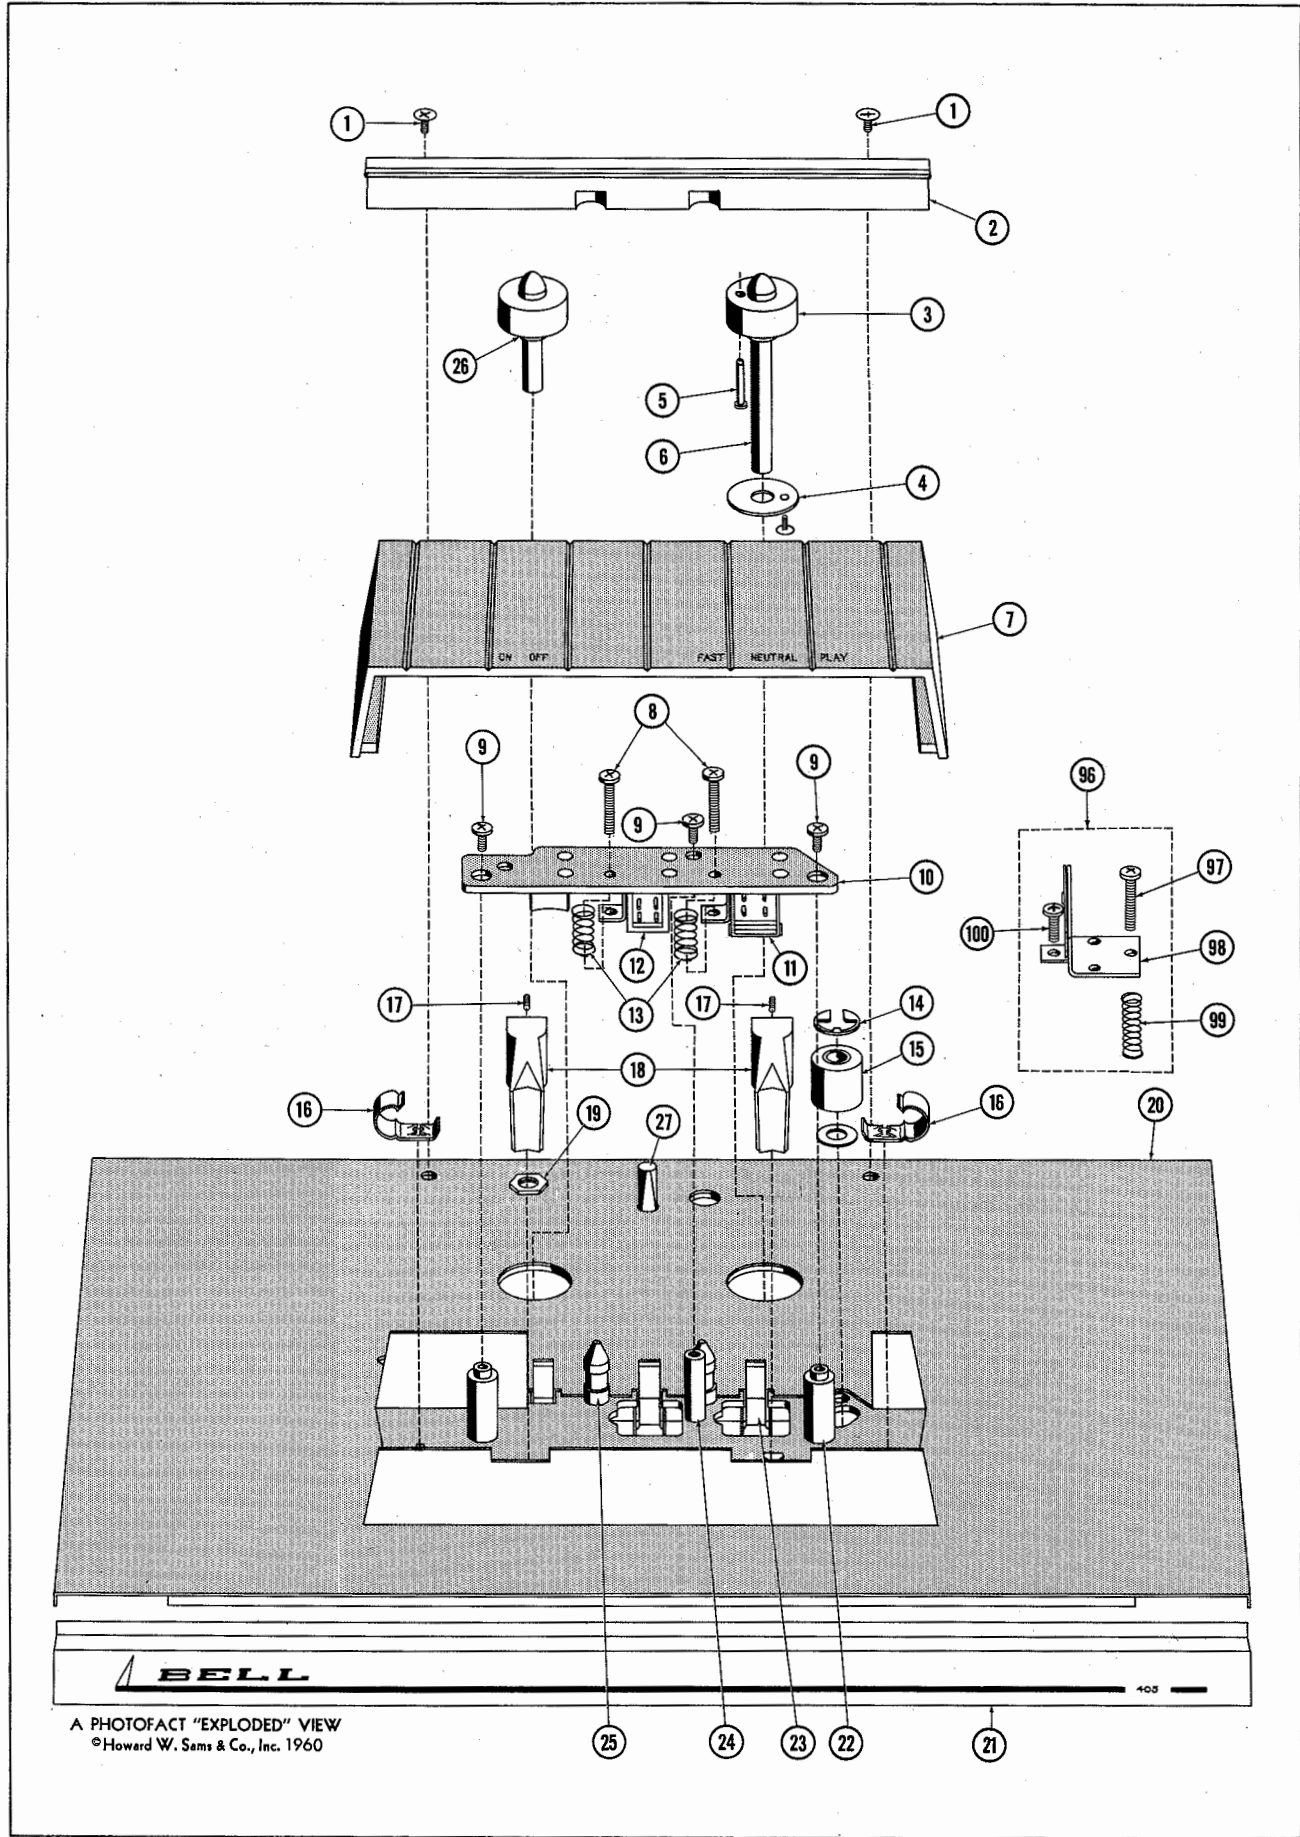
A EXPLODED VIEW OF PARTS ABOVE DECK COVER
